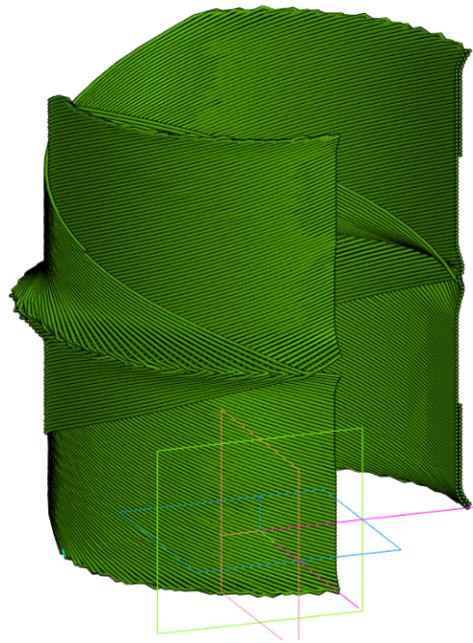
9 Computer model of thread winding with a closed structure, gear ratio $u = \frac{128}{61}$
